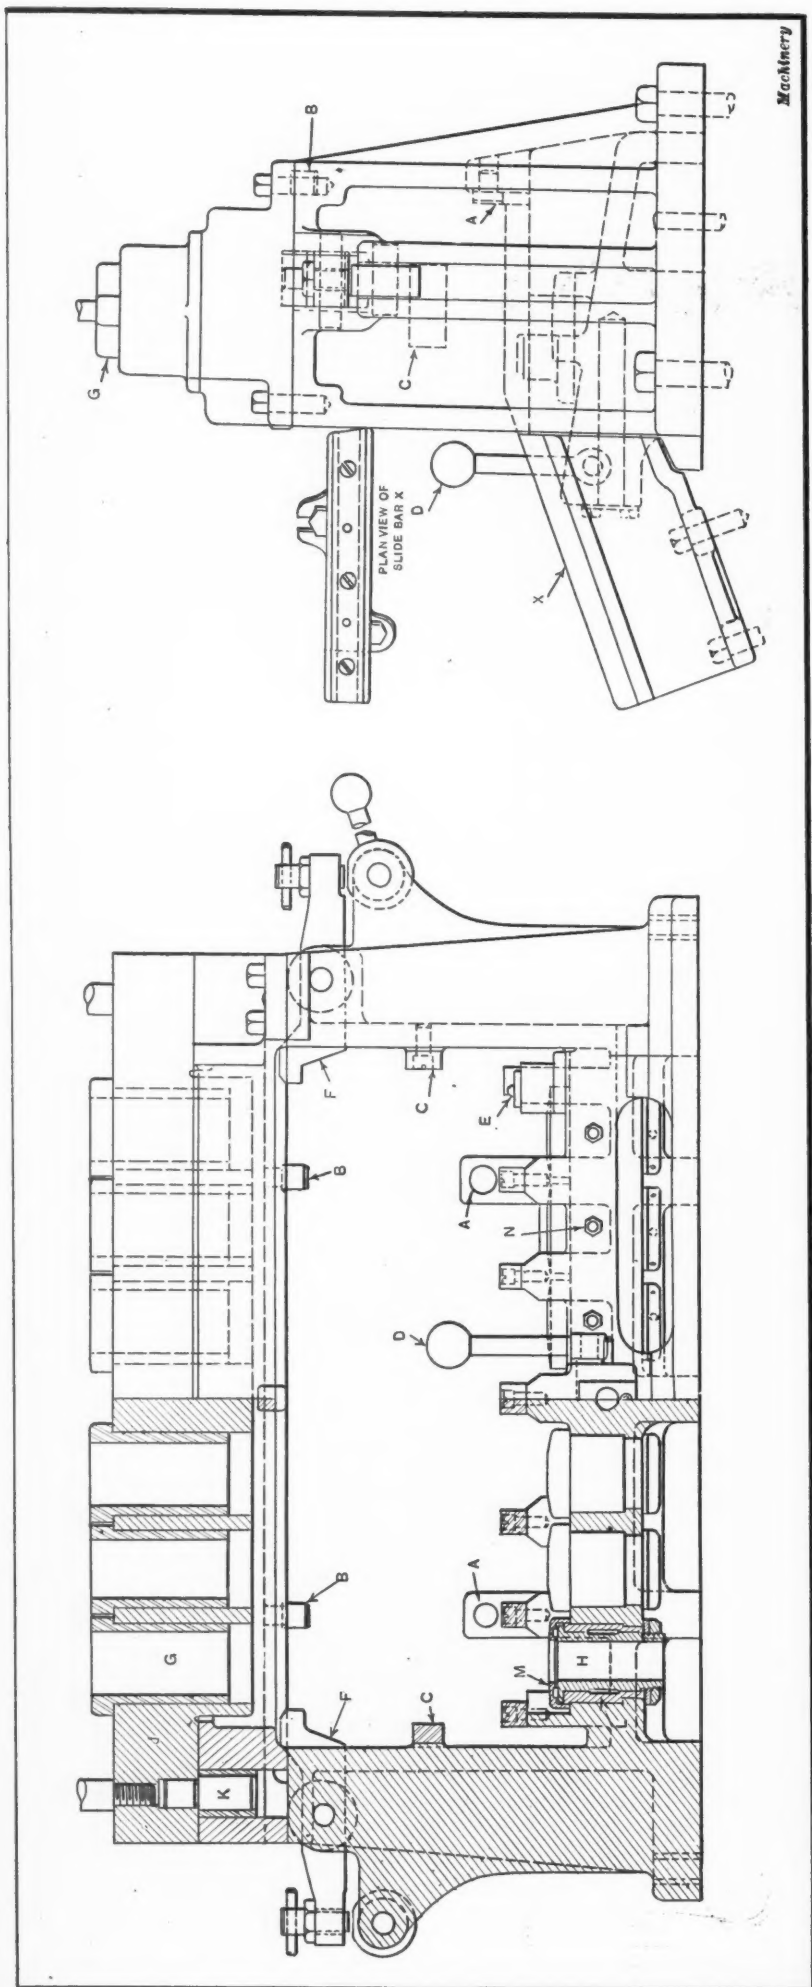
Jig used on an Inclined Type of Multiple-spindle Machine for finish-boring the Cylinder Block
